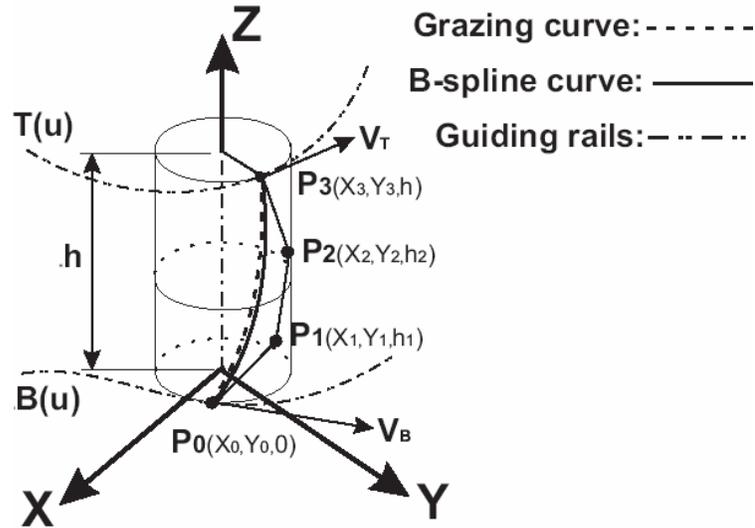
Grazing curve and its control points on the cylindrical cutting tool surface
